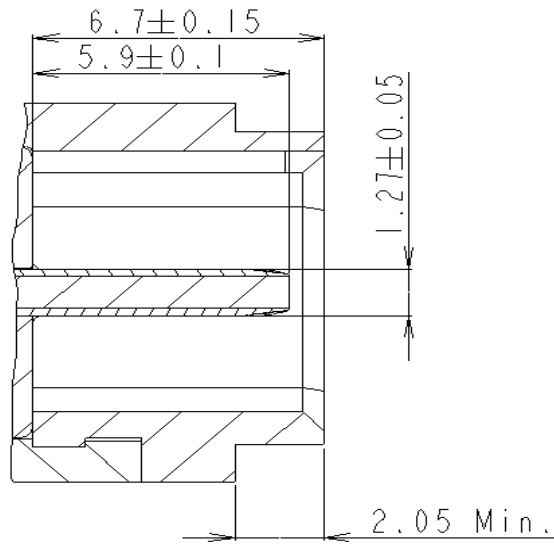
Jack Screw Plug Dimensions (With Key Slots/Without Key)
